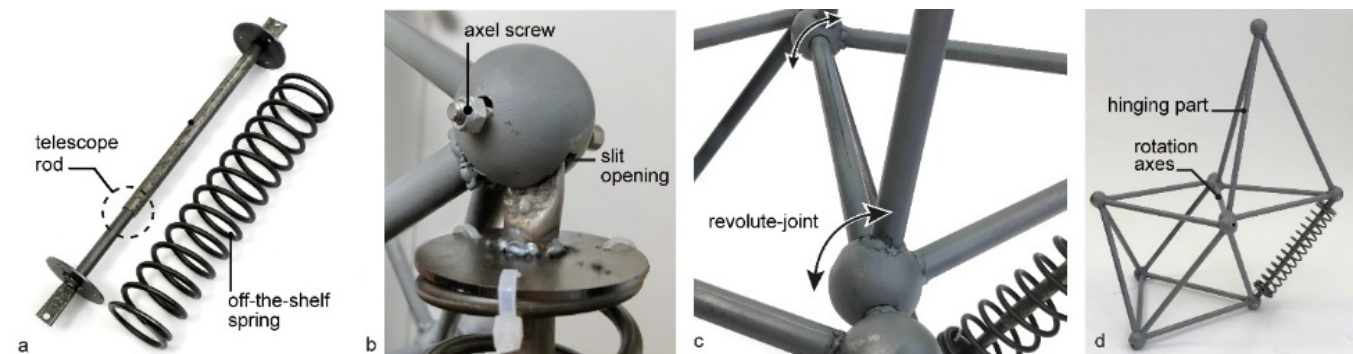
(a) Spring-telescope fabricated using two fitting tubes. (b) Slit opening on a sphere for inserting the telescope. (c) Revolute-joint connection. (d) Assembled chair model with a springy backrest.
